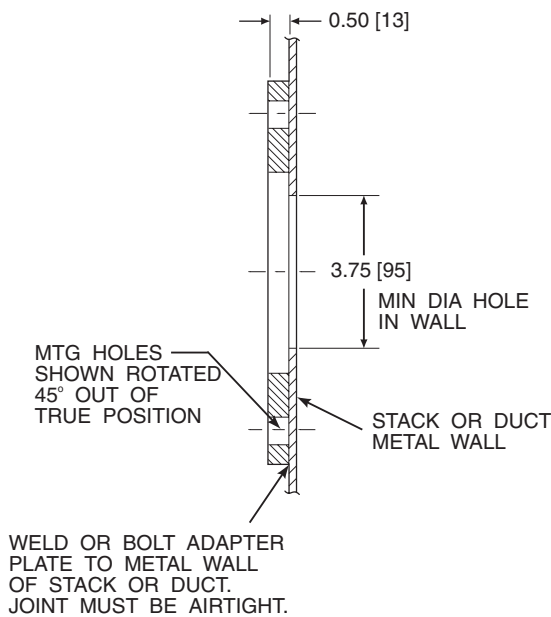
Oxymitter DR Adapter Plate Dimensions
